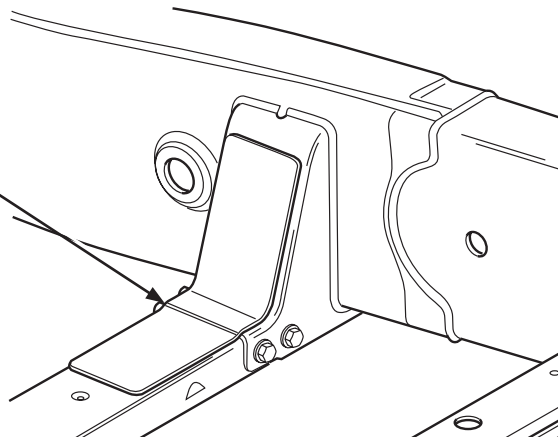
STICK ON HEAT SHIELD LOCATION
